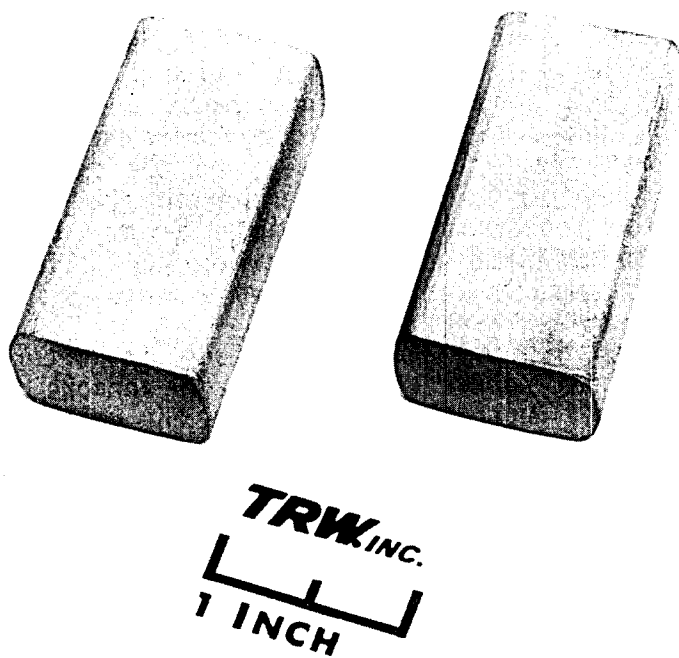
(b). First Series of Forging Trials - MA-6000 Forgings.
